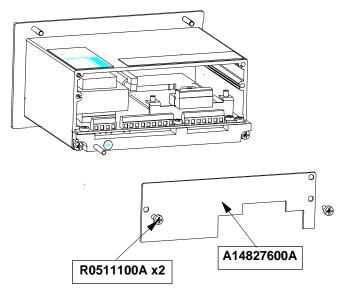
Allen-Bradley PCB Installation in Panel Mount Enclosure
